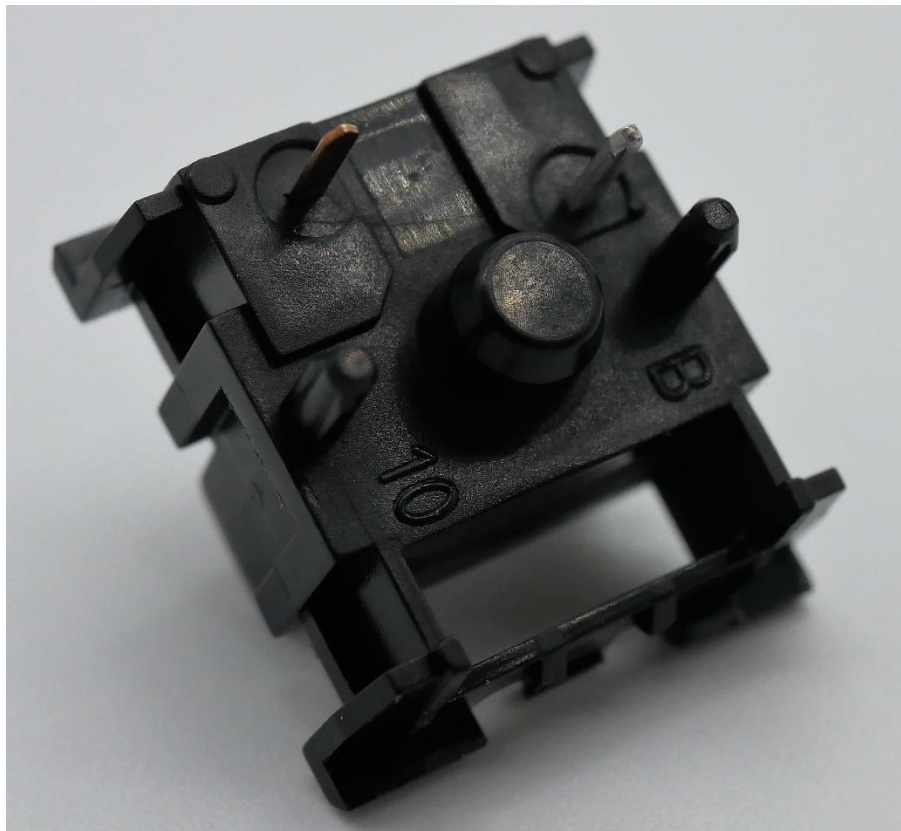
Novelkeys Cream+ bottom housing external design showing wide open LED slot, PCB mounting pins, and sideways mold markings above LED slot.
